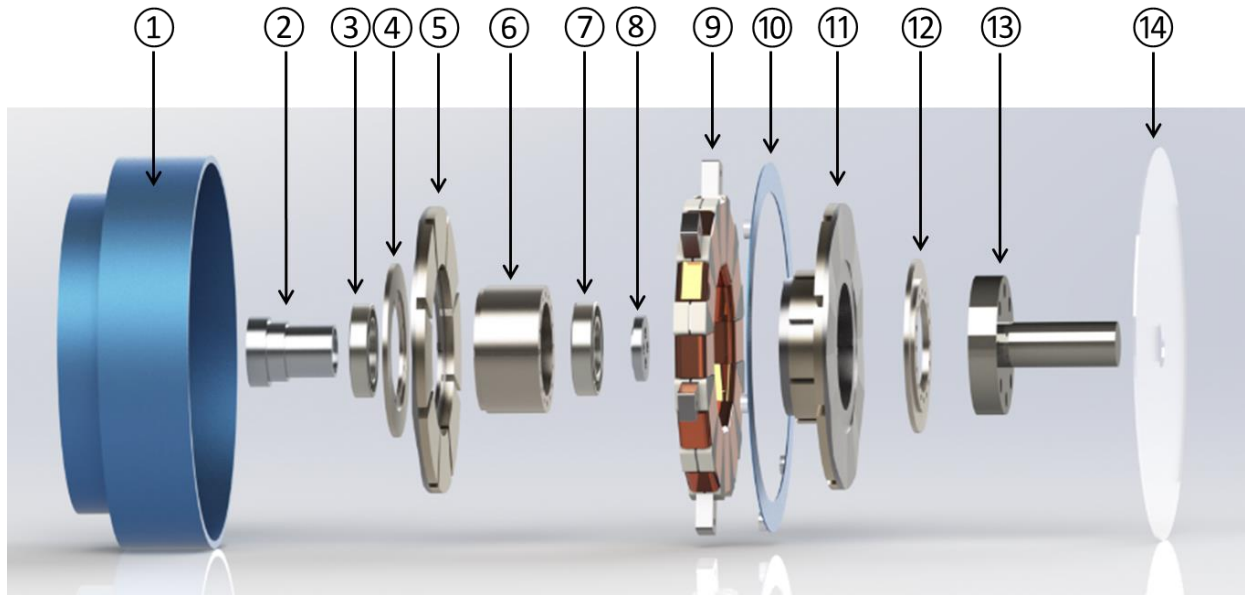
21. Cut-away view of the prototype machine assembly
